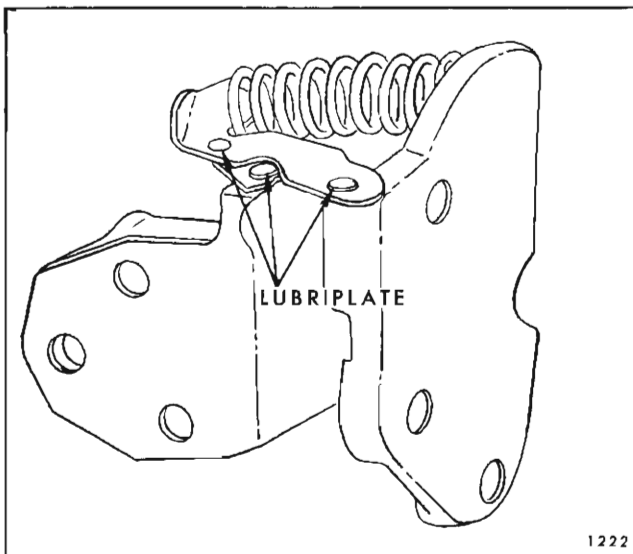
B1—Front Door Hinge Hold Open: Lubrication of Rear Door Hinge Hold Open Typical
